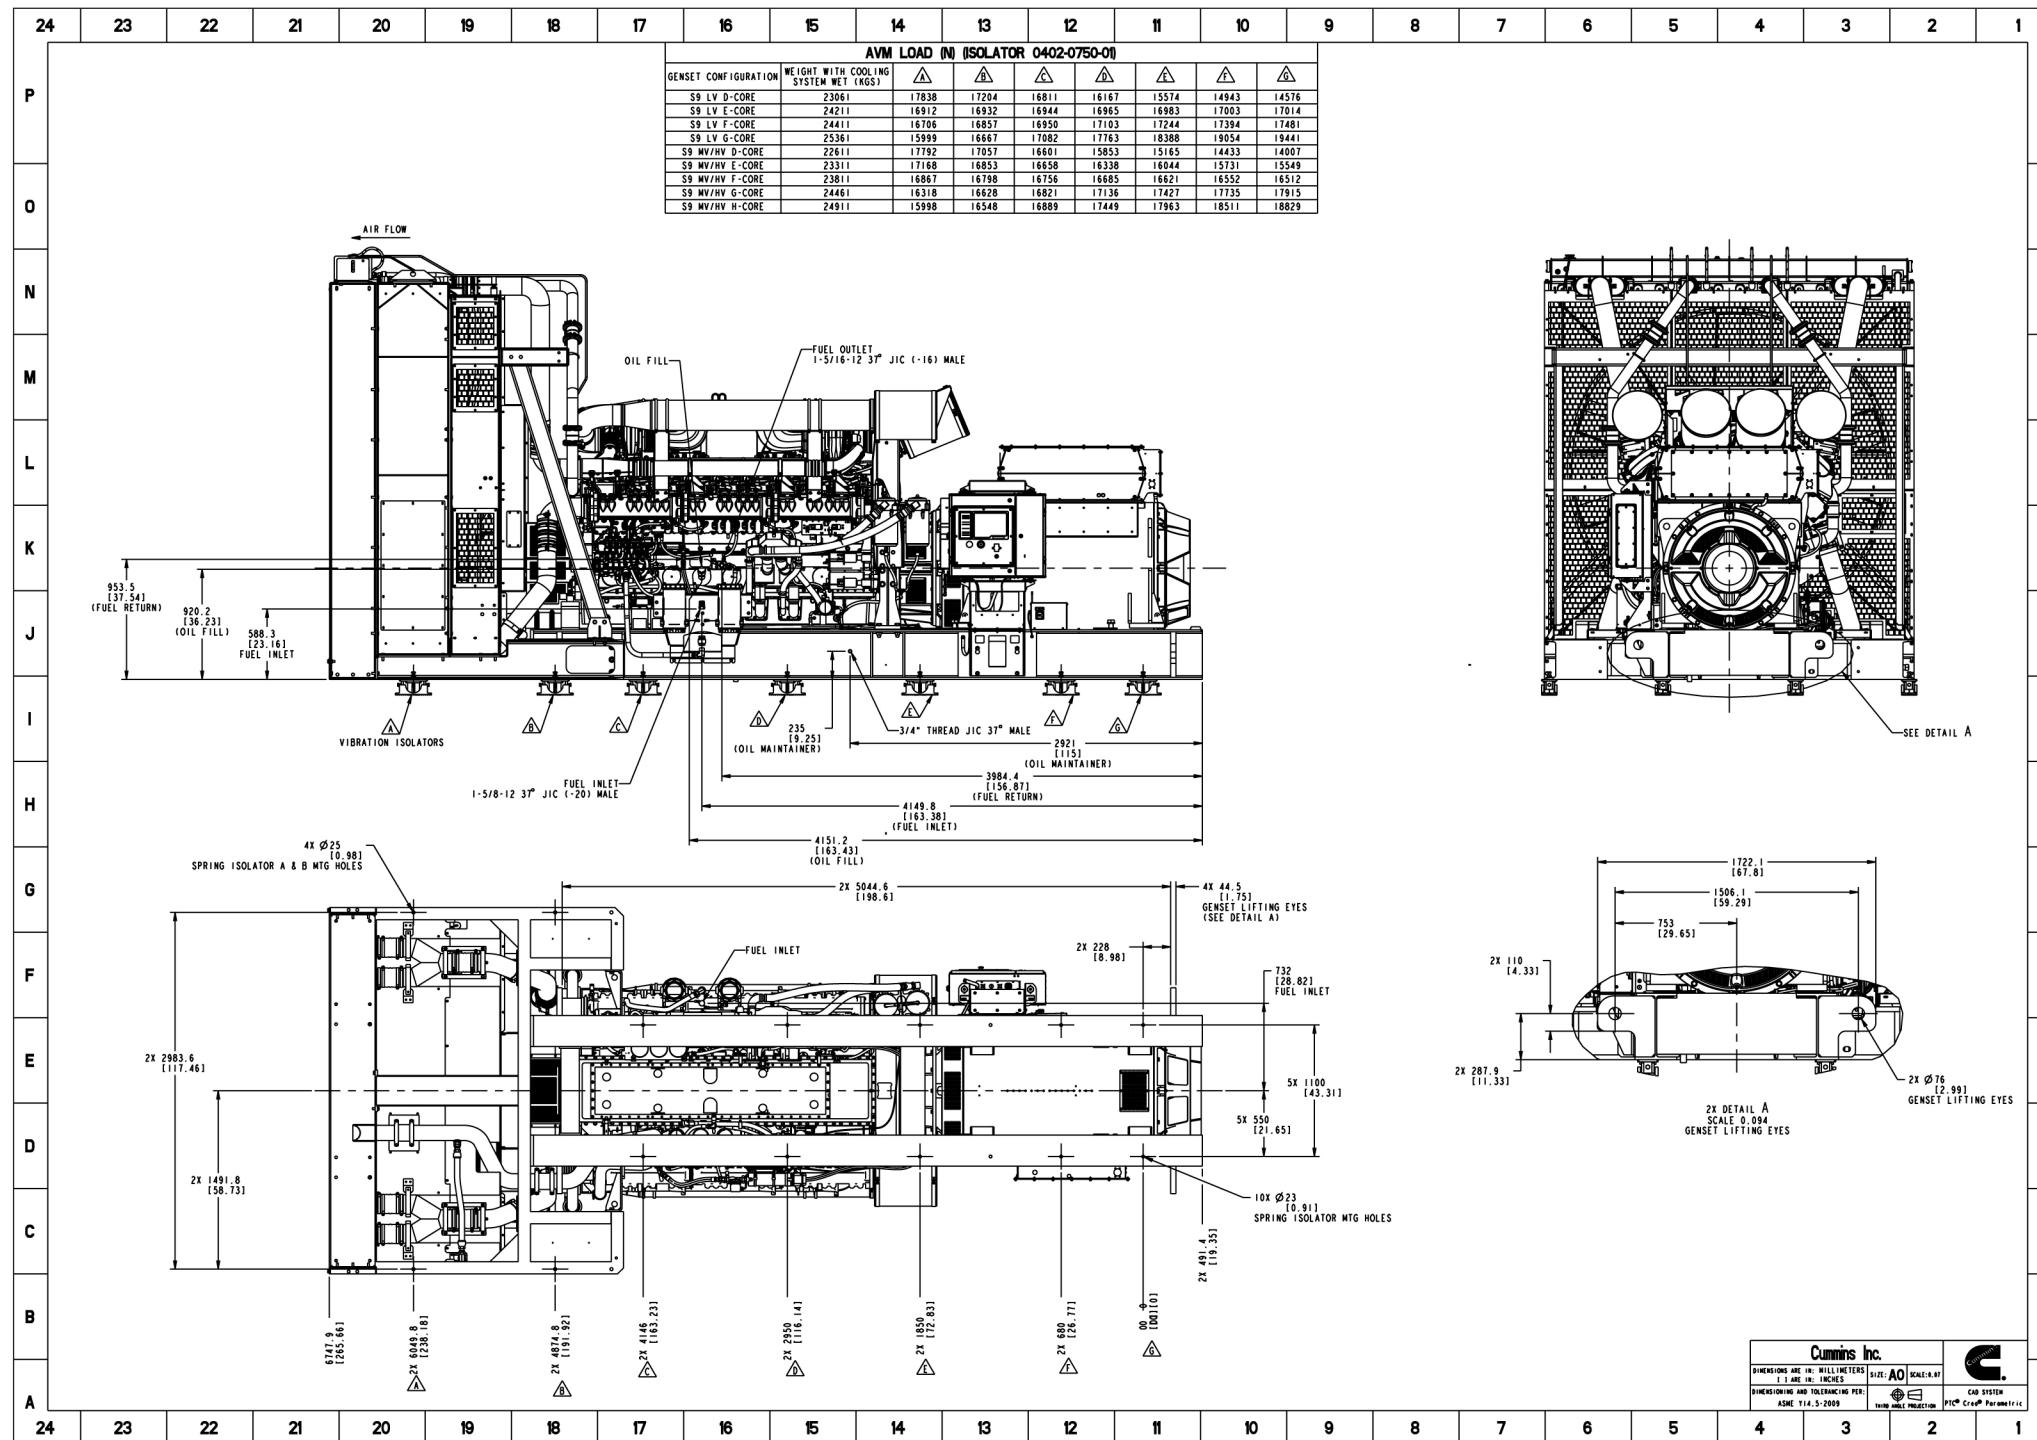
OUTLINE DRAWING (SHEET 4 OF 8)
